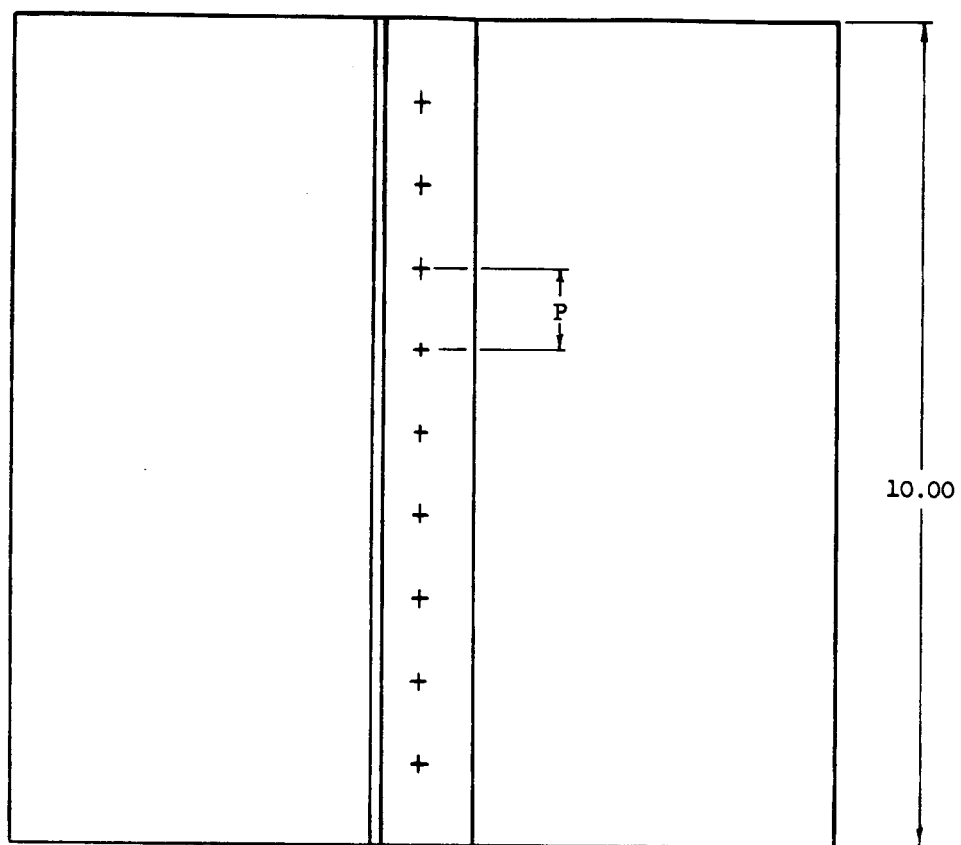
Basic configuration of contact-joint specimens. Dimensions are in inches.
